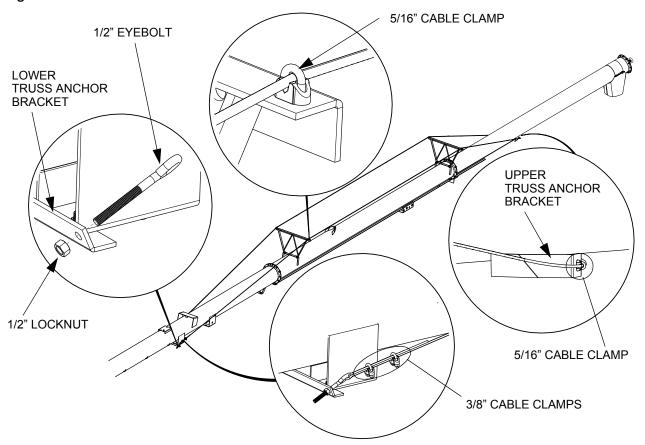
MKX13-74 Truss Support and Truss Cable Brackets
